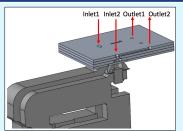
Cut-away view of microvalve assembly. A screw head mounted to the piezo actuator arm pushes the push-plate to exert force on membrane. 3-DOF positioning error of piezo actuators are adjusted or absorbed by shims and the push-plate mechanism.
